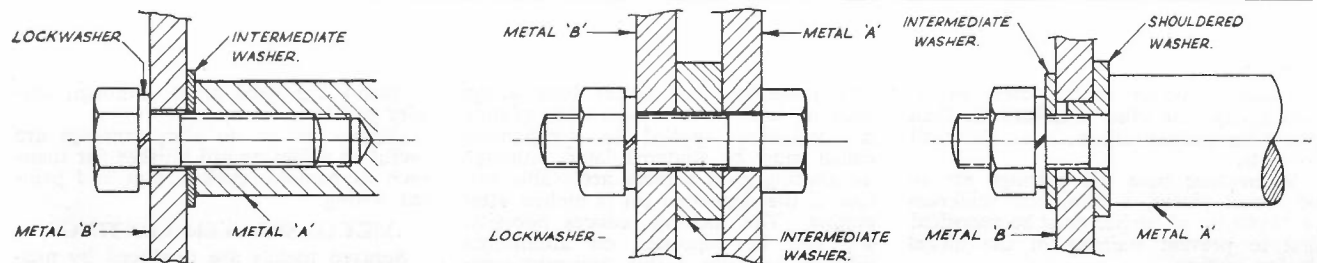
Typical assemblies for joining metal A to metal B (see Table 2). Left and centre: Two assemblies with intermediate washers. Right: Typical assembly with shouldered and intermediate washers.
